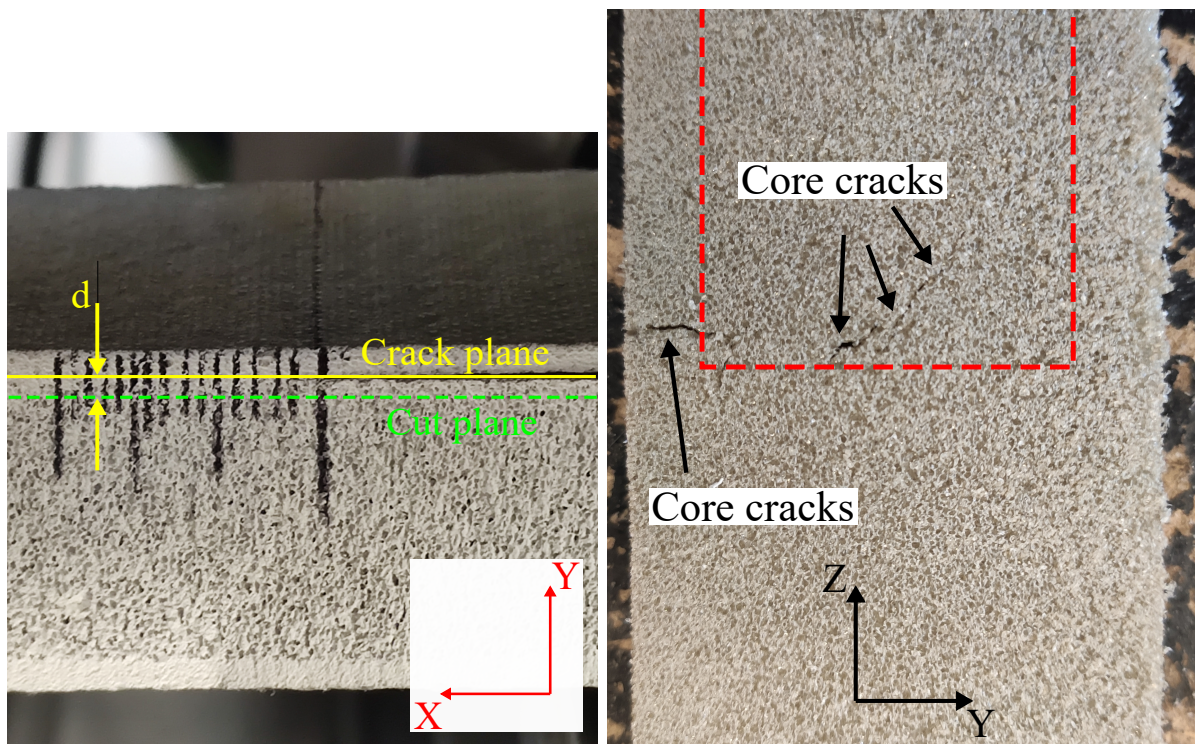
Crack front detail of a cracked H80 sandwich specimen.
